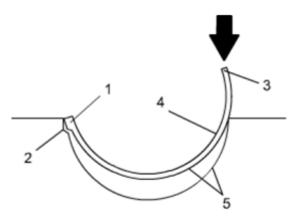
Identifying Camshaft Bearings Courtesy of SUZUKI OF AMERICA CORP.
